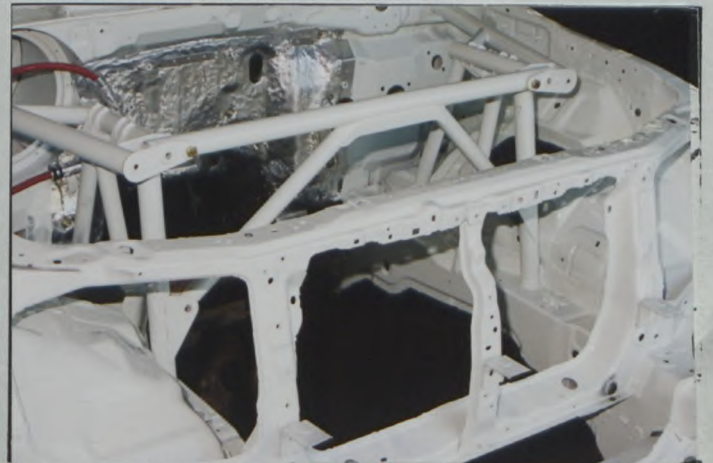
FRONT HOOP TO BULKHEAD
